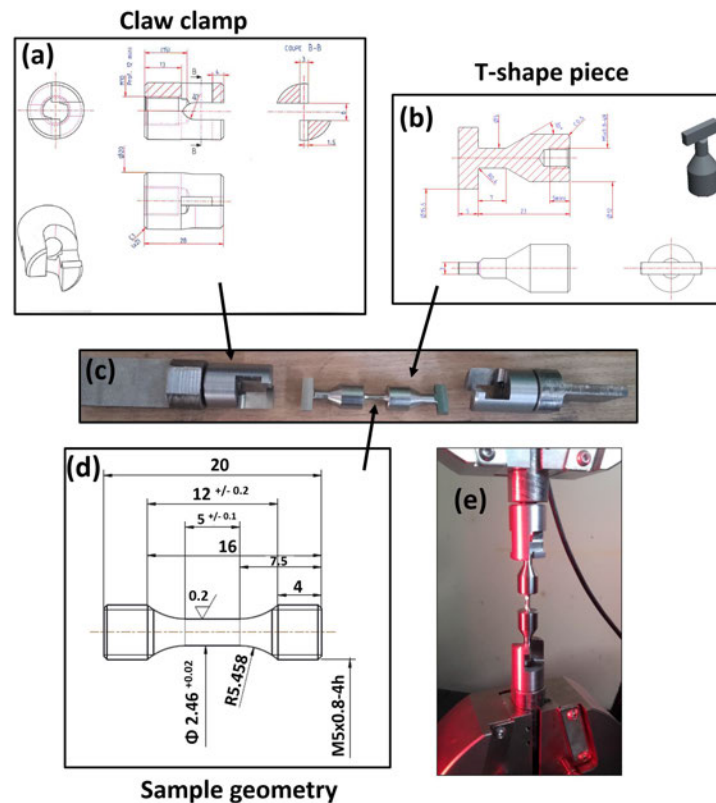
Reproduced from [LIE 19]. Geometries of (a) the claw clamp piece, (b) the T-shaped piece and (d) a tested sample used during tensile tests. Image of the all general set up before (c) and during testing (e).
